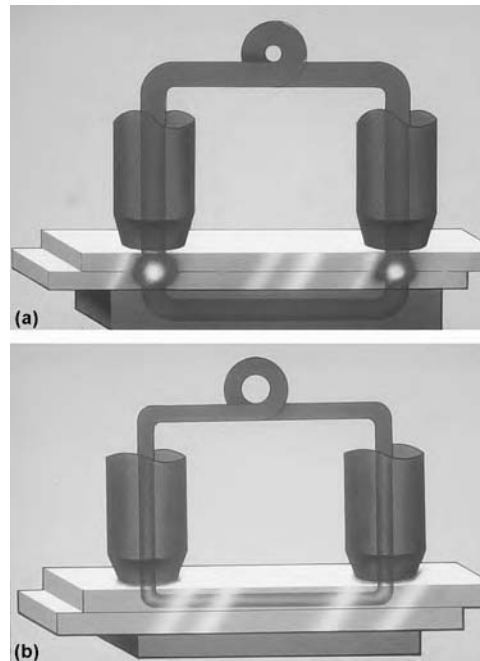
Series direct spot weld. (a) Good conduction through the shunt and formation of two welds. (b) Current shunting in heavier-gage top section, which prevents weld formation and causes overheating at the contact points of the two electrodes
